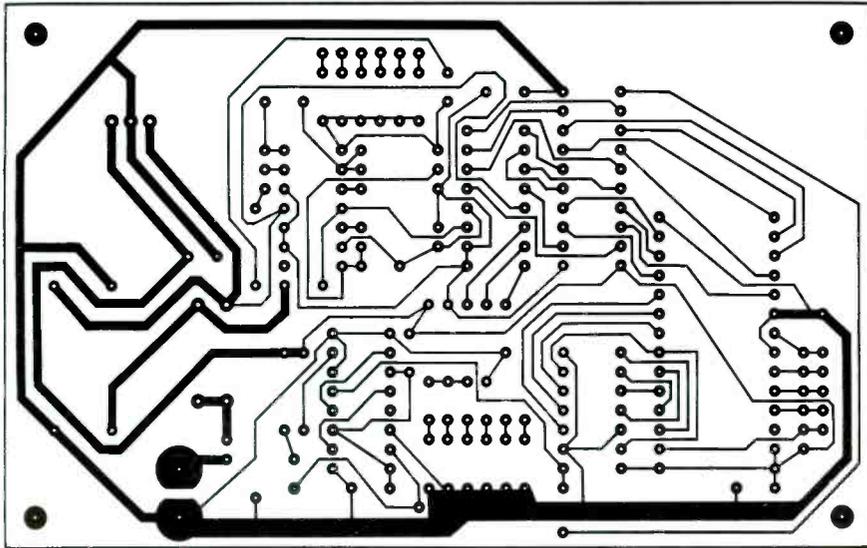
Actual-size etching-and-drilling guide to be used for fabricating printed-circuit board.
